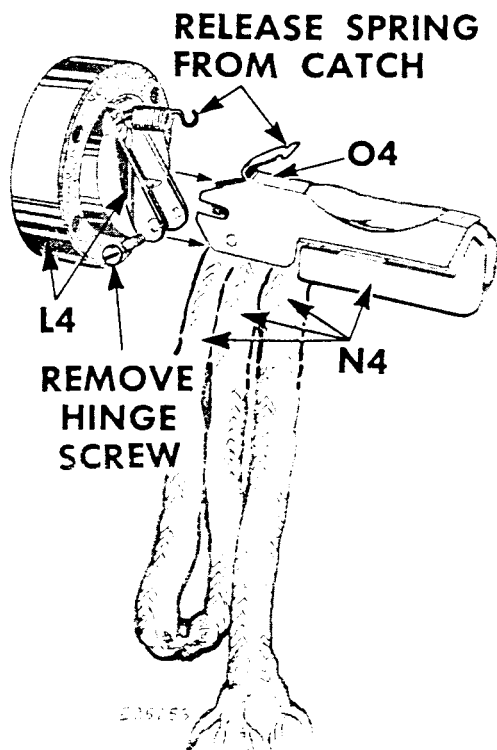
Disassembly of Oil Removing Wick (Showing Oil-Removing Wick Holder Body and Spring 147108)
